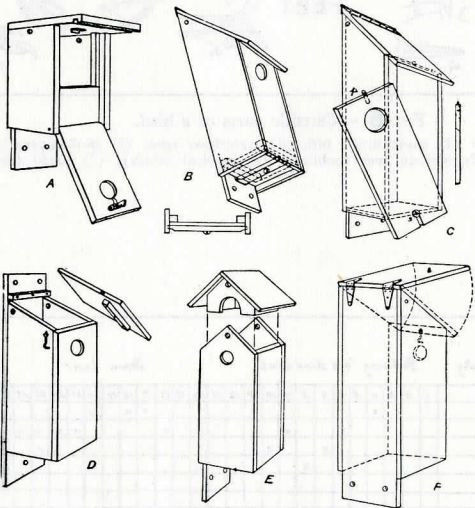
Accessible nest boxes. A, hinged front held by a catch; B, removable bottom held by cleat; C, swinging front held by removable pin; D and E, removable tops; F, hinged top.
